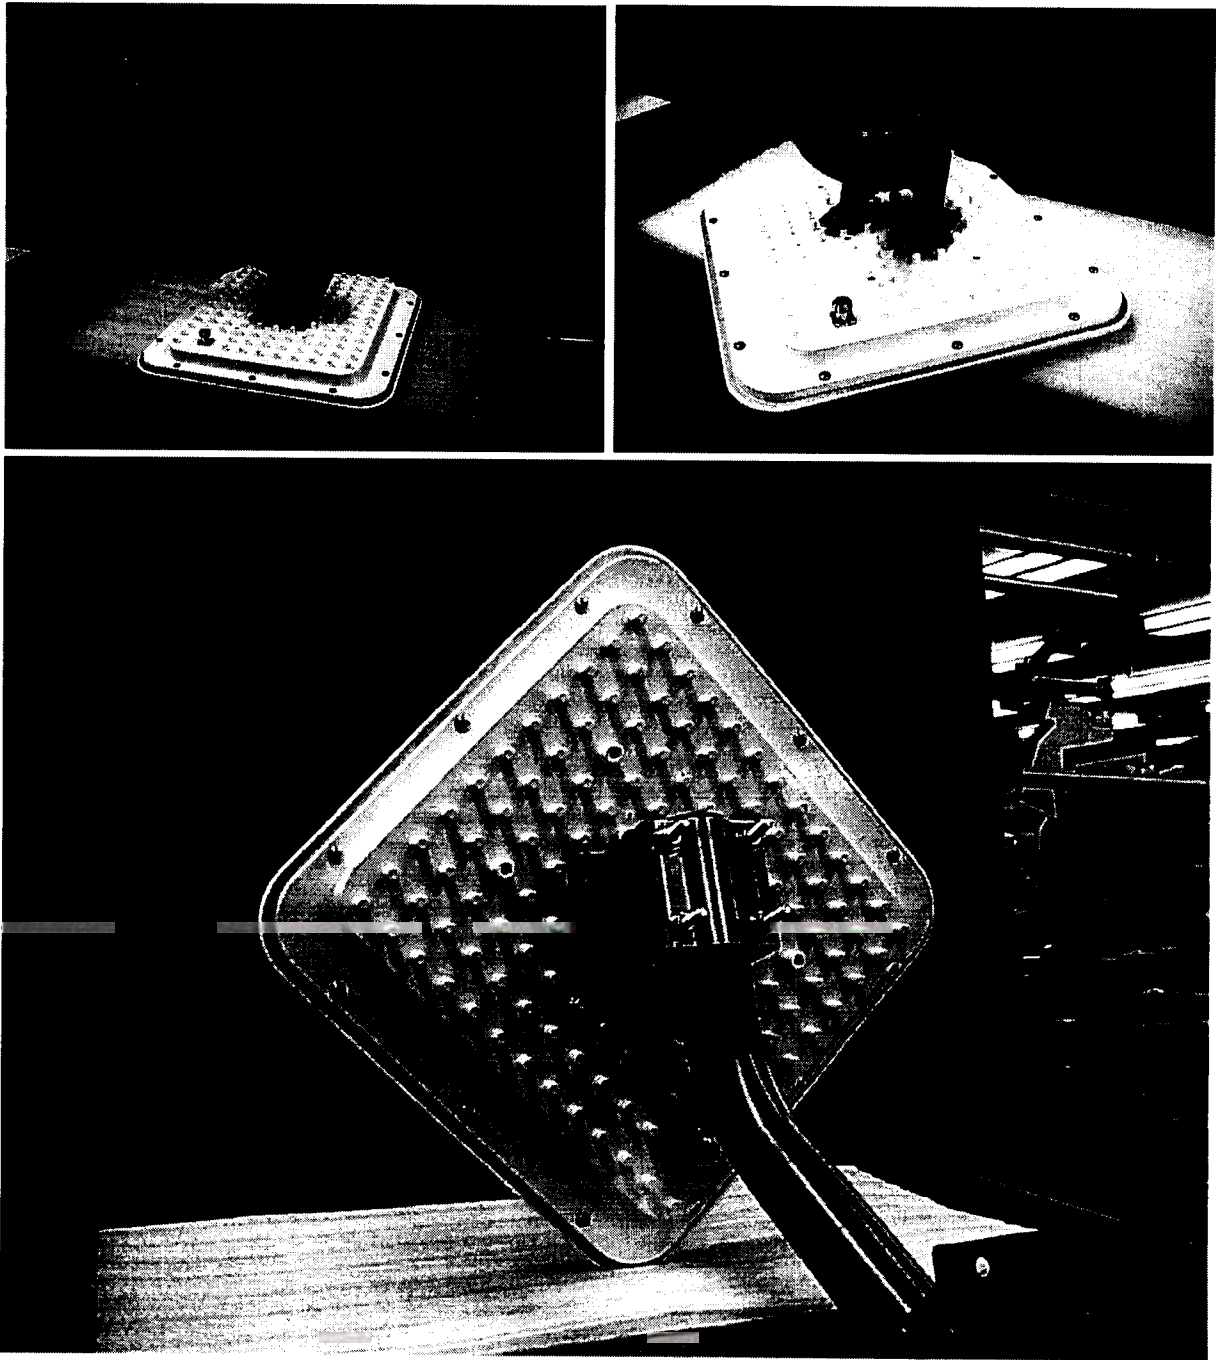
Attaching the gray mounting arm to the angled mounting bracket, and the angled mounting bracket to the chassis.
